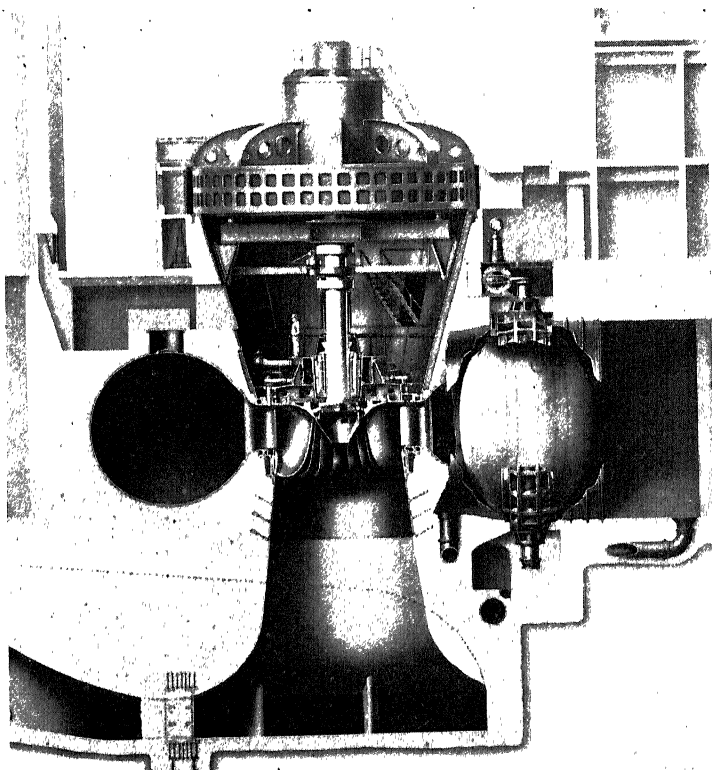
Propellor turbine wheel with adjustable blades (102 in. diameter).
